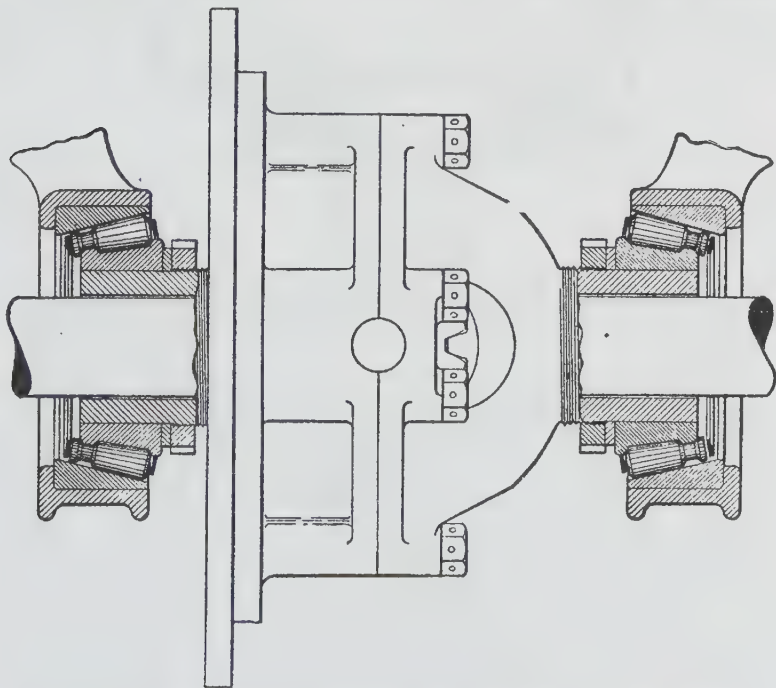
ENDWISE ADJUSTMENT OF DIFFERENTIAL MOUNTED IN ROLLER BEARINGS.
